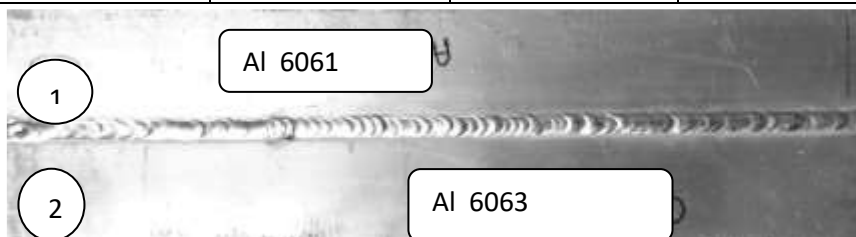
TIG welded Al 6061 / Al 6063 Plates
